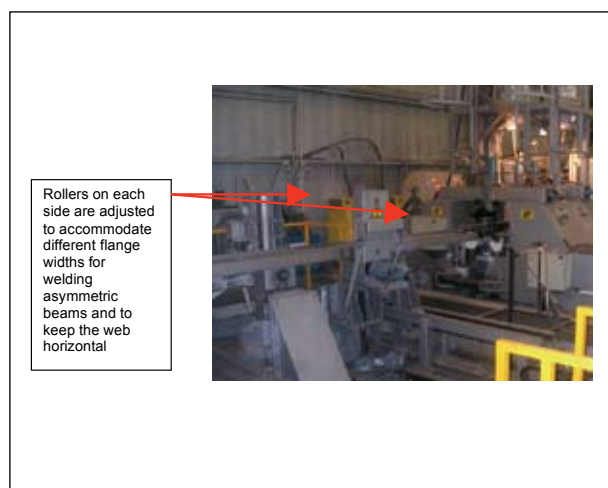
Welded beam line in the UK set up for welding asymmetric sections (Photo courtesy Brian Mahony)
